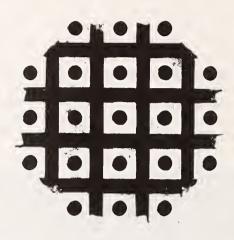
A photograph of the face of a tool head for forming mesa diodes by ultrasonic machining. The overall size of the face is approximately 25 by 25 mm.
